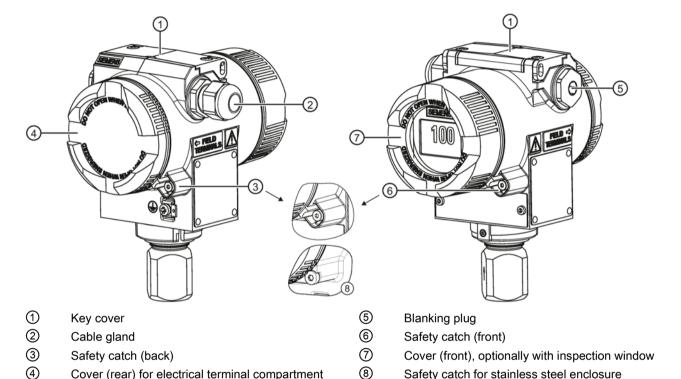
View of the pressure transmitter: Left: Back right: Front view
